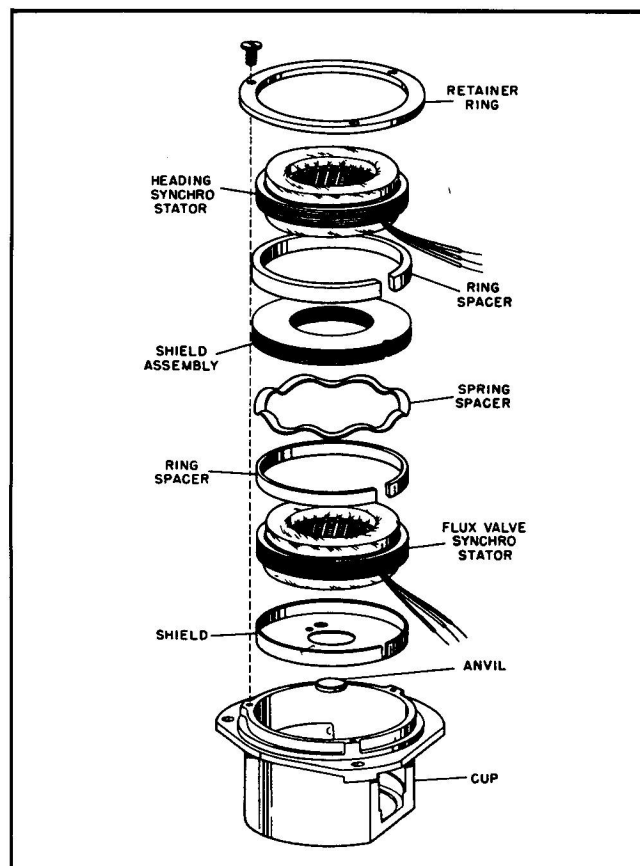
Exploded View of Cup Assembly (Synchro Stators)
